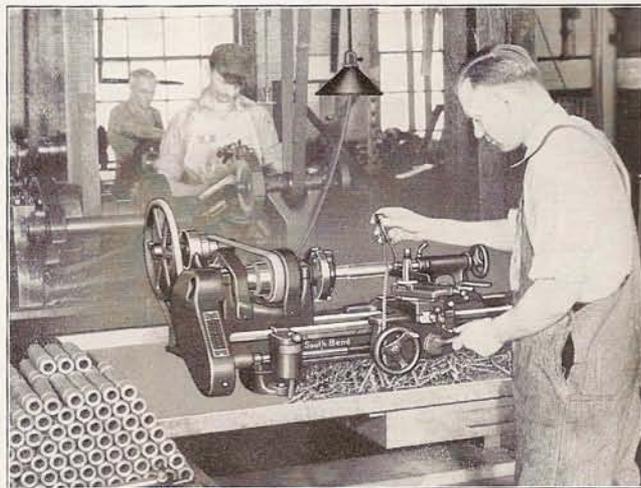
The 9-inch "Workshop" South Bend Back-Geared, Screw Cutting Lathe Used for Production Work in a Manufacturing Plant.
